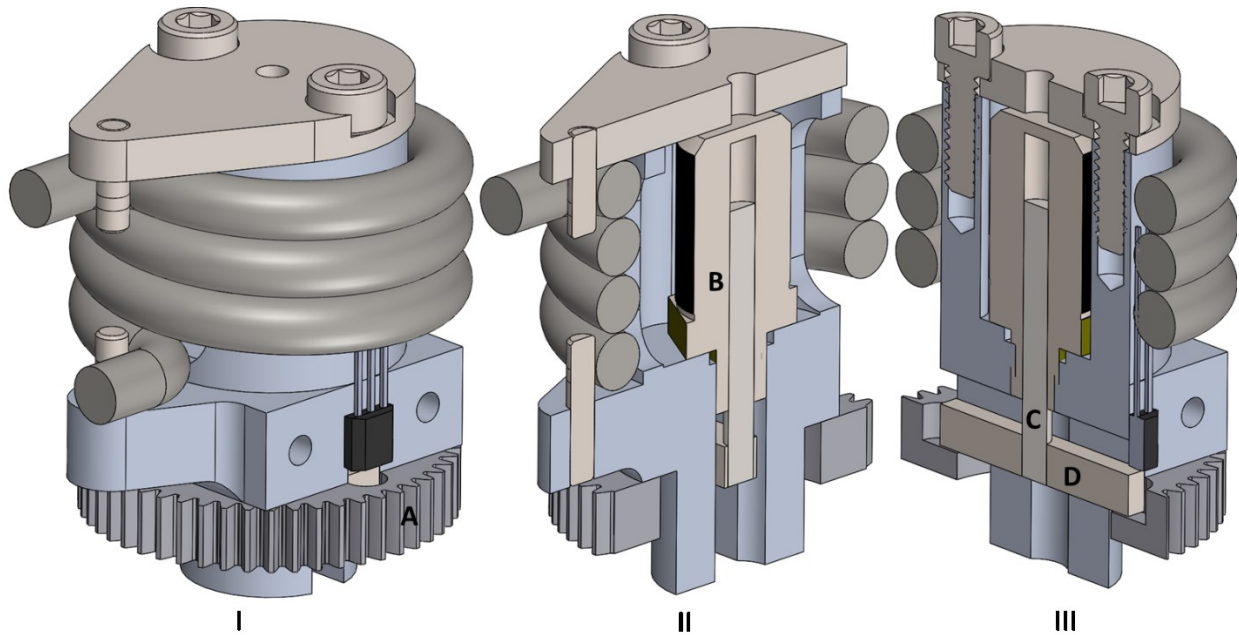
Spring Post Lock Detail I) Full View, II) Lateral Section, III) Frontal Section; A) Driven Gear, B) Solenoid, C) Solenoid Plunger, D) Lock Key
